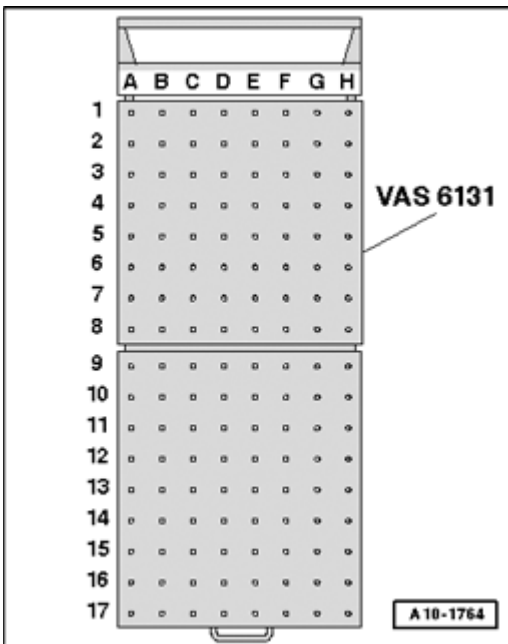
Identifying Scissor Lift Platform VAS 6131
